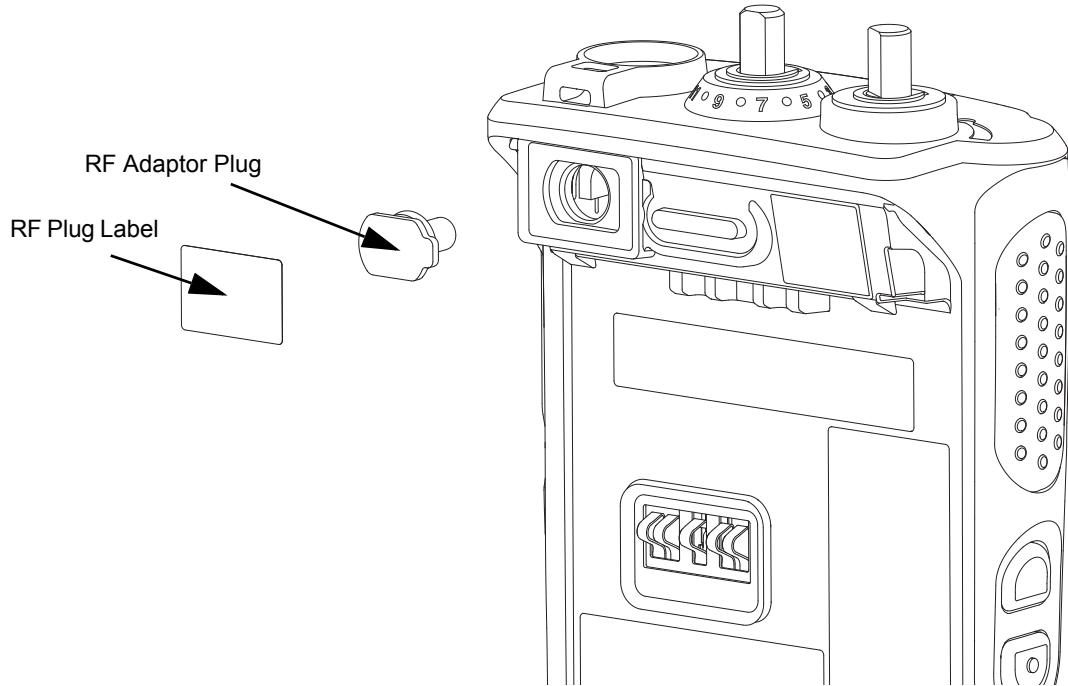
RF Plug Label and RF Adaptor Plug Removal
